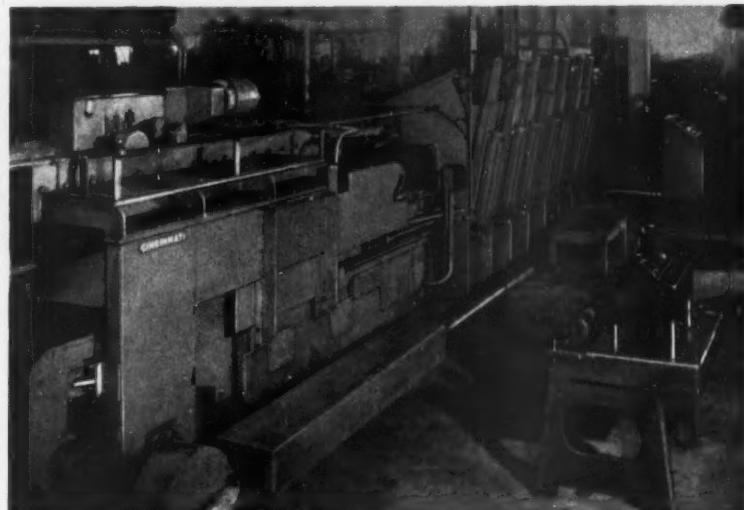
Automatic broaching machine for Ford six-cylinder blocks
